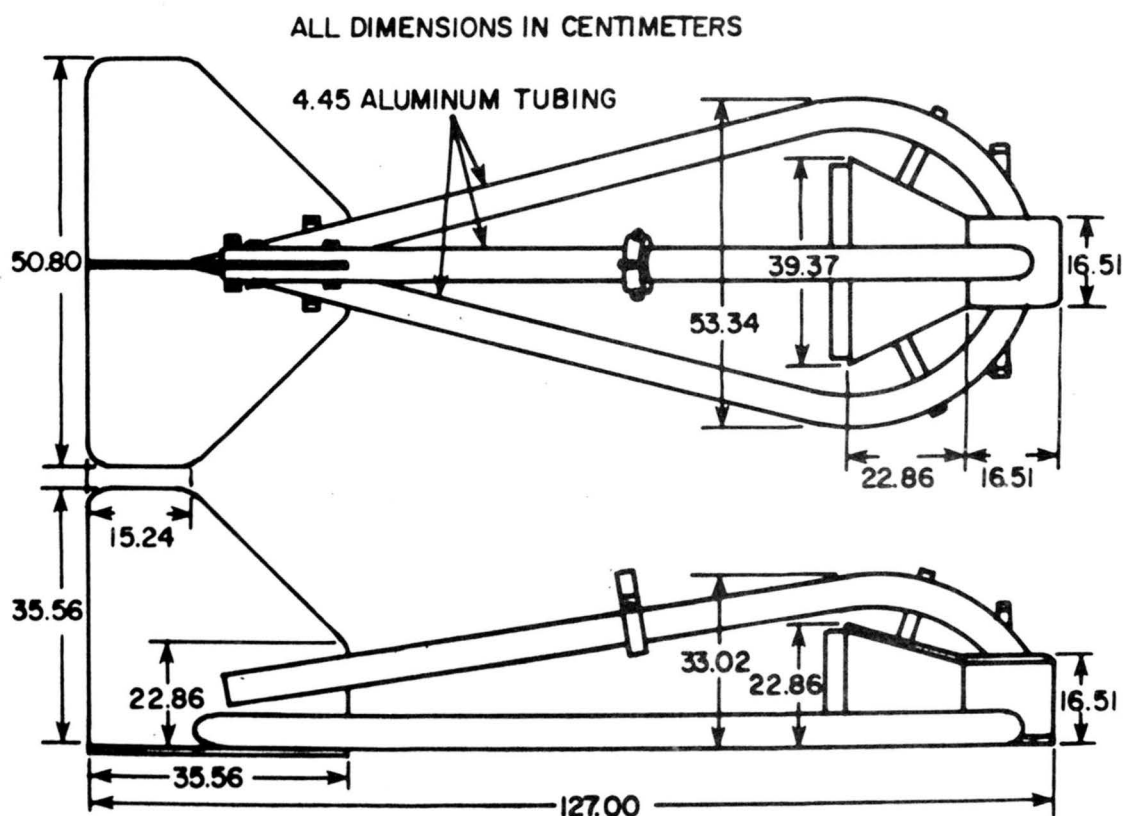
Plan and side elevation of 15.24-cm Helley-Smith bedload sampler
